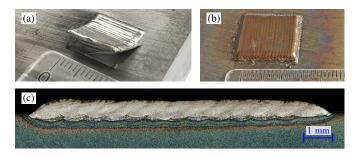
Torn out single-layer cladding without preheating (a), preheated tenlayer cladding without cracks (b) and microsection of a three-layer cladding.
